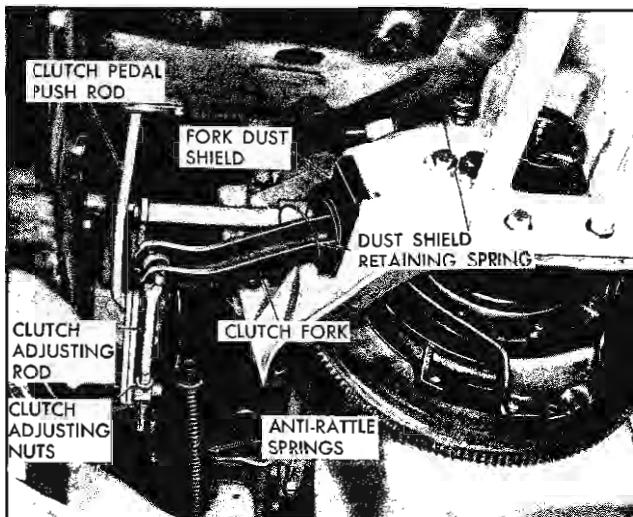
D-9 4 Cylinder Engine Lower Clutch Linkage
